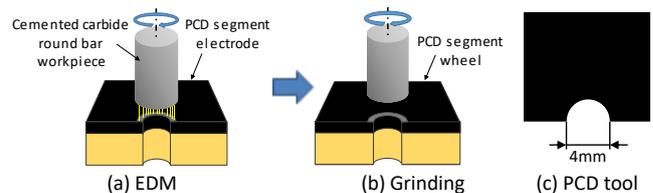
Sequential machining of EDM and grinding using PCD segment tool
